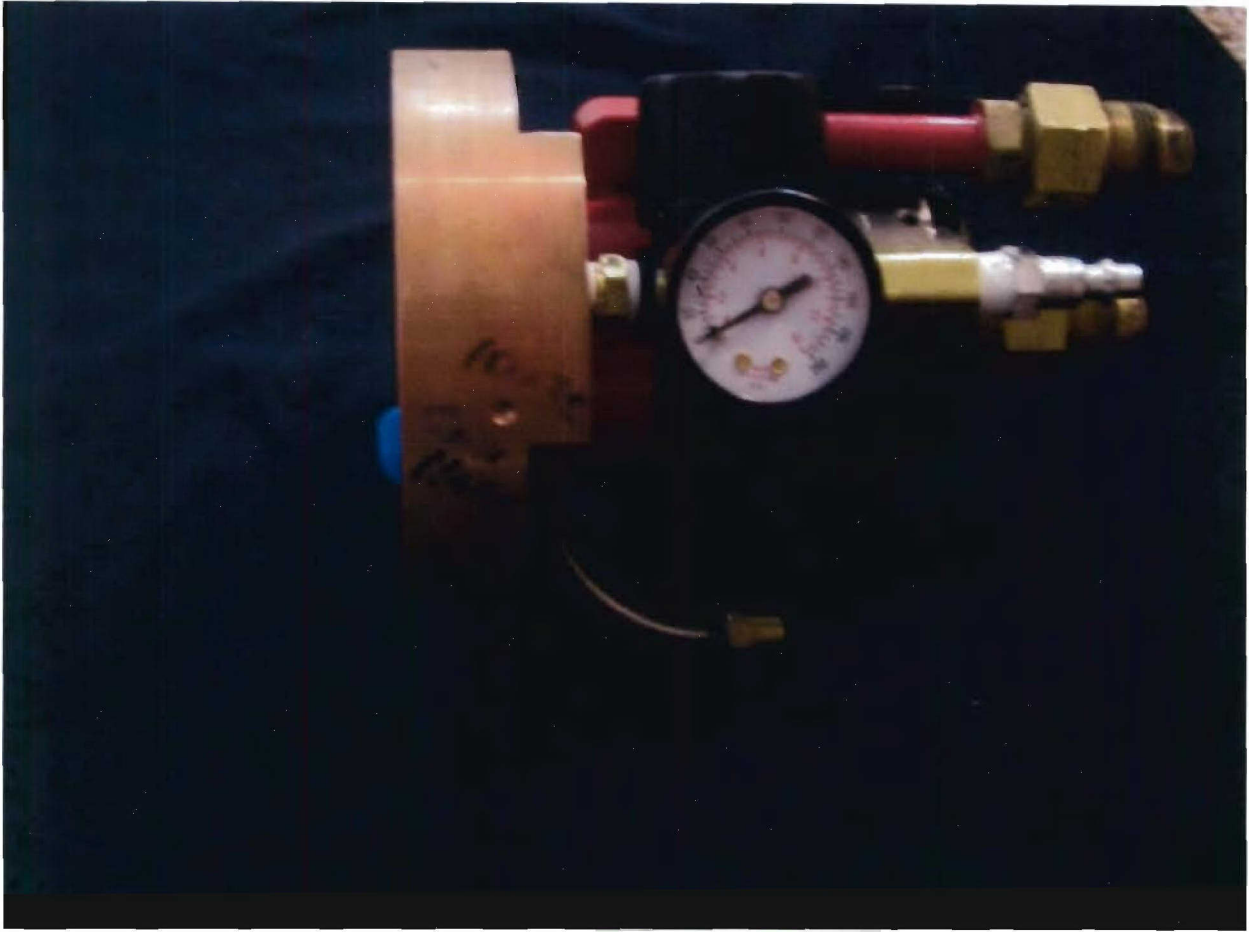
The mounting plate assembly mounted on the SG-100 with the shroud gas flow fitting visible in the foreground.
